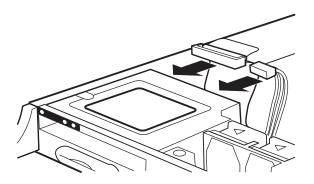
Connecting the Cables to the DVD Assembly
